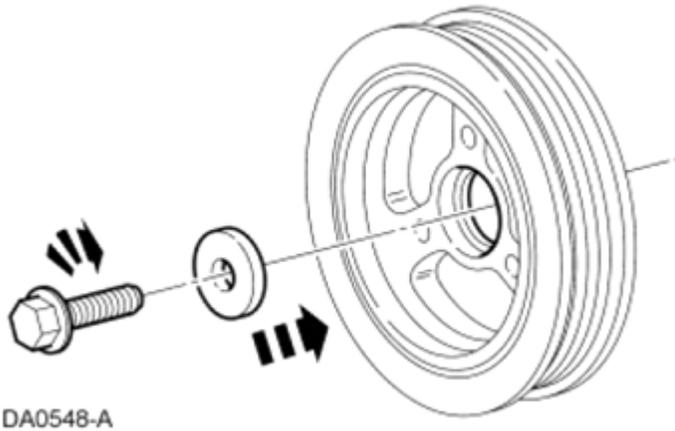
Installing Crankshaft Pulley Bolt & Washer
